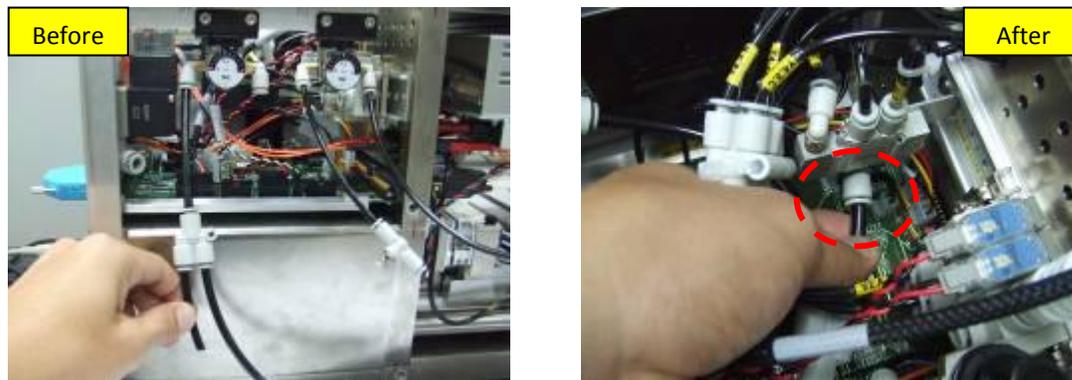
Plugging the M6 tubing end from Y-joint 6 to 6 into the elbow fitting
